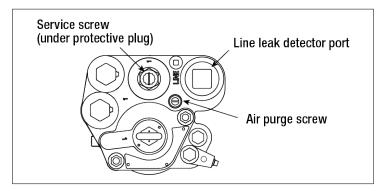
Locating Discharge Port Plug for Line Leak Transducer
